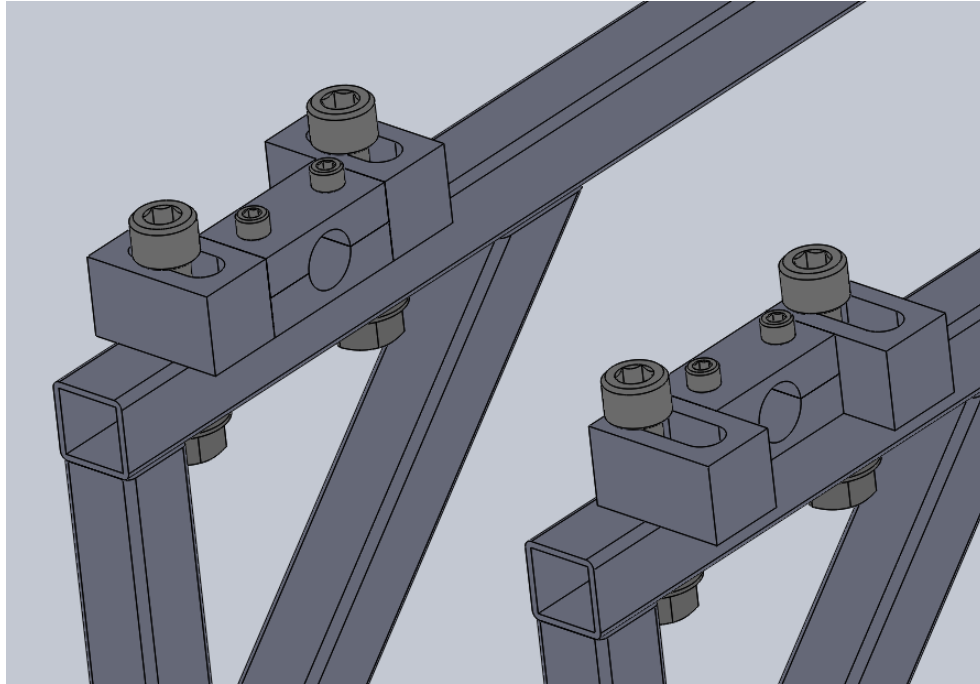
Bicycle axle mounting assemblies fastened to the frame.
